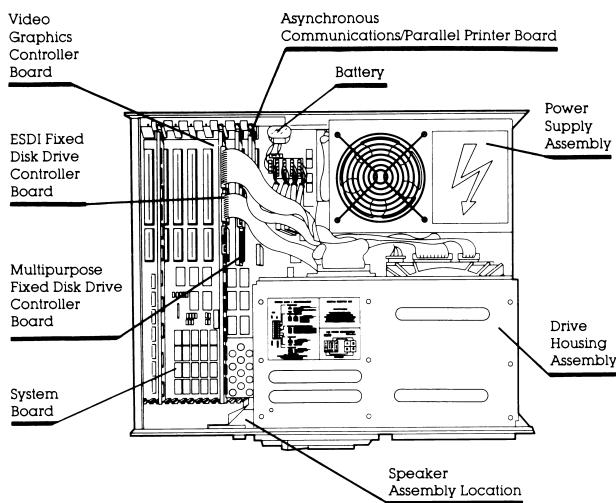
Overhead View of the COMPAQ DESKPRO 286 Personal Computer with the System Unit Cover Removed.
